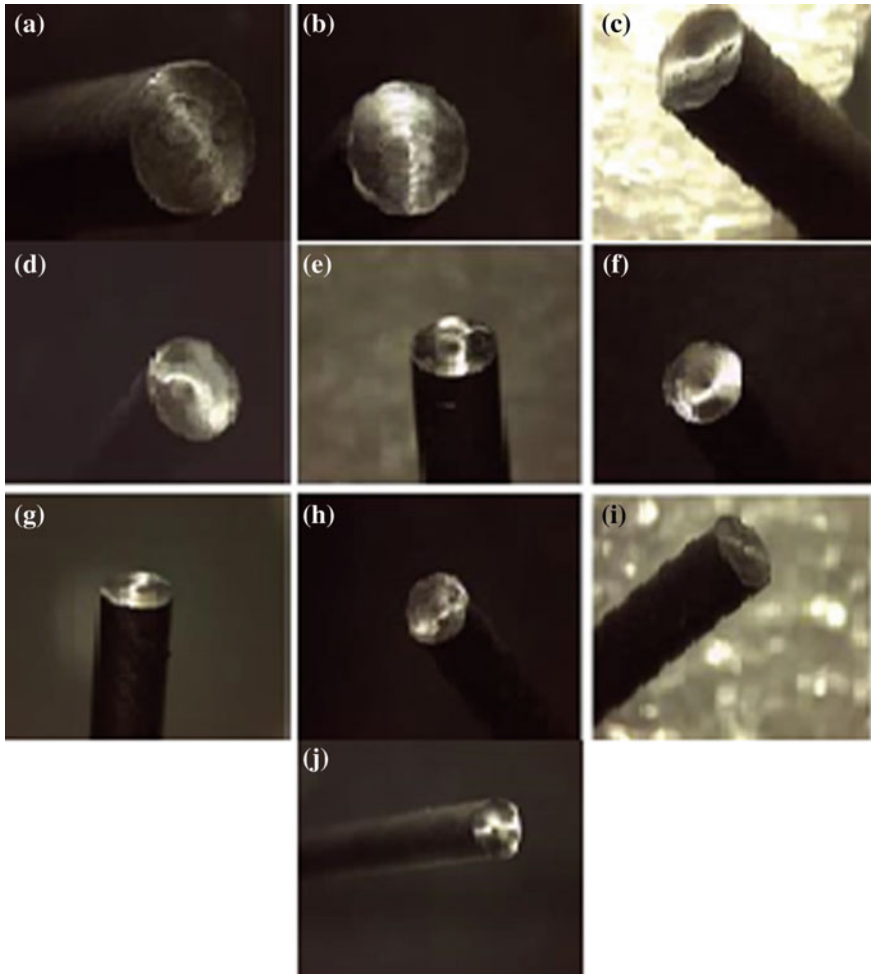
The stereomicroscopic images of cup-cone fracture after UTS test for pass schedule-2
